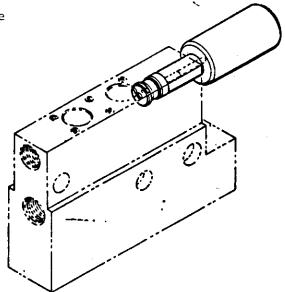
Installation of the Slide and Sleeve Assembly, Part No. 42584, Using Differential Valve Installer, Th2550-8
